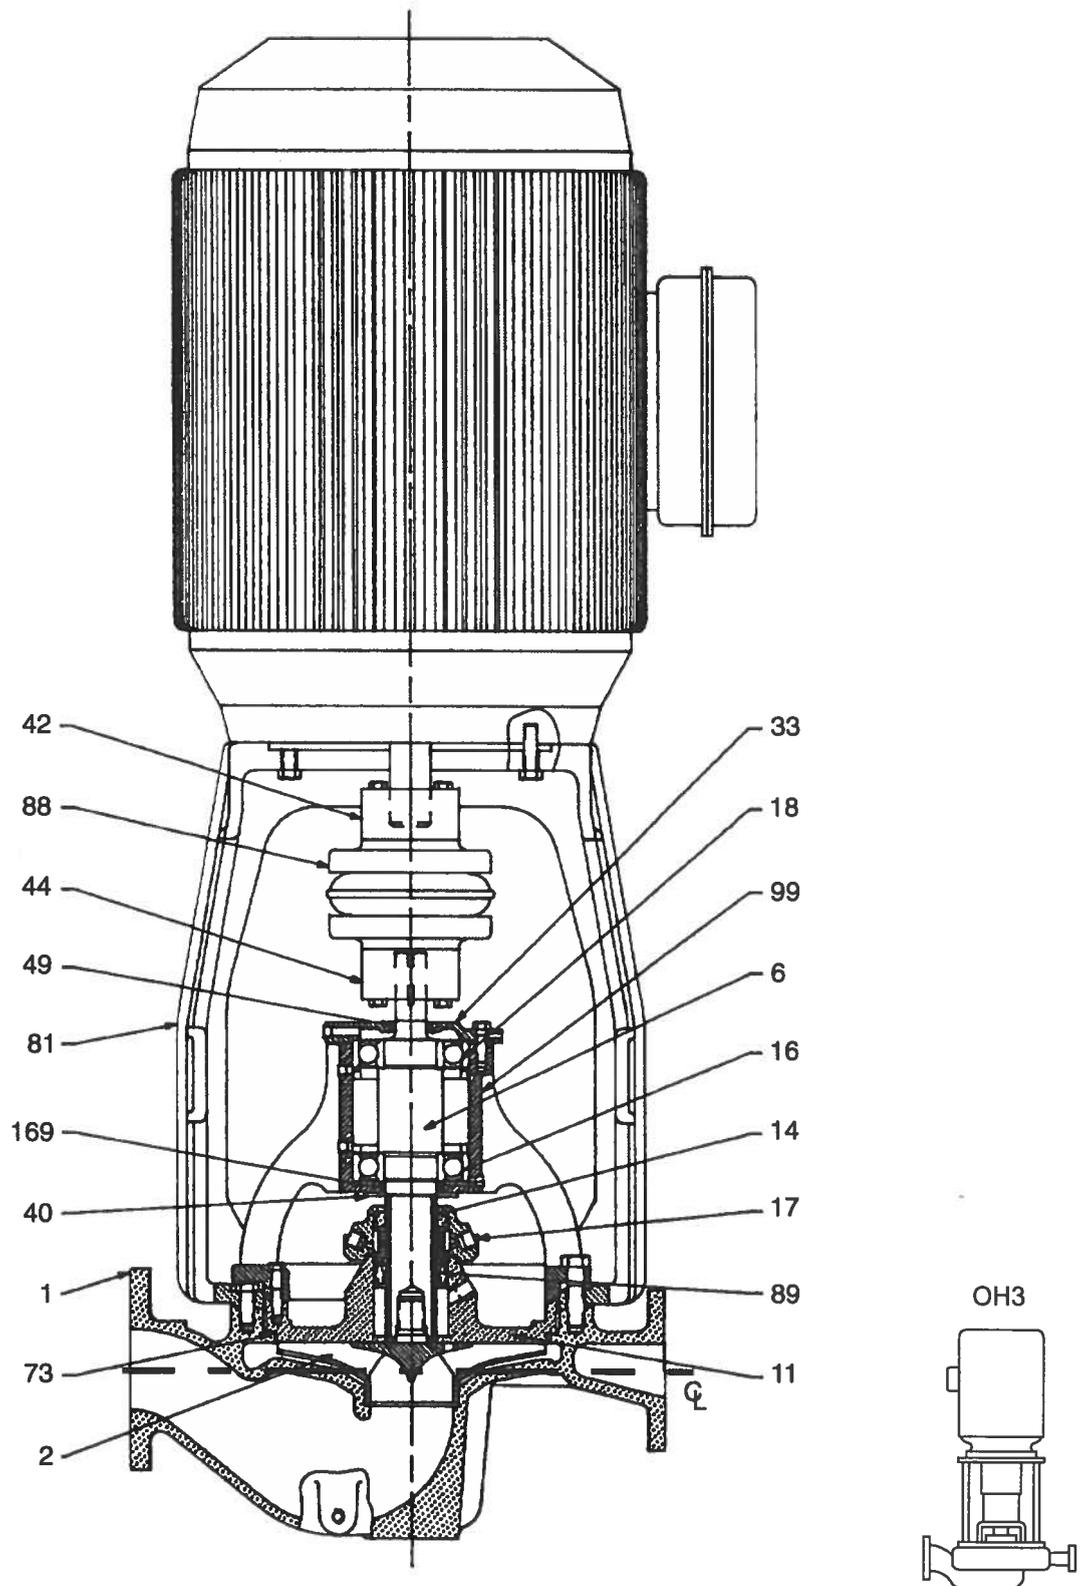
Overhung impeller – integral bearing frame – single stage – in-line – flexible coupling
